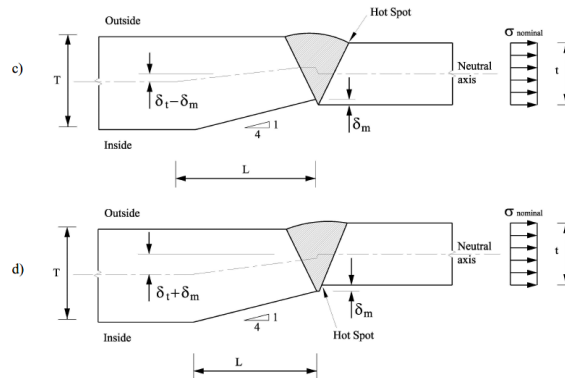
Geometry and fabrication tolerances for but welds in tubular sections, source:DNVGL-RP-C203 [14]
